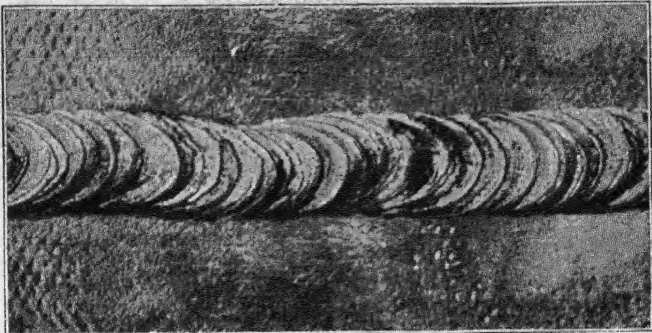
Weld in $\frac{3}{8}$ -in. copper sheet.
